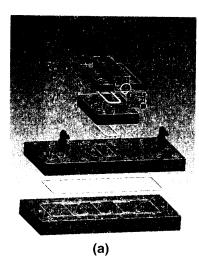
(a) Exploded view of final T-chan design of flow chamber. (c) Photograph of
